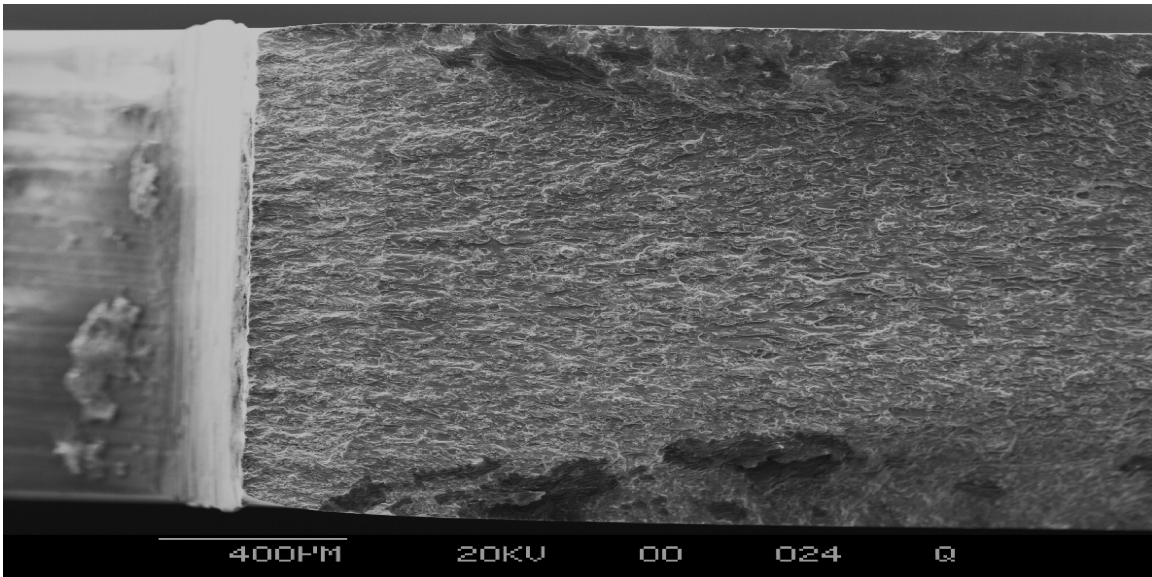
Fracture surface of specimen 1-S near the hole showing initial crack.
